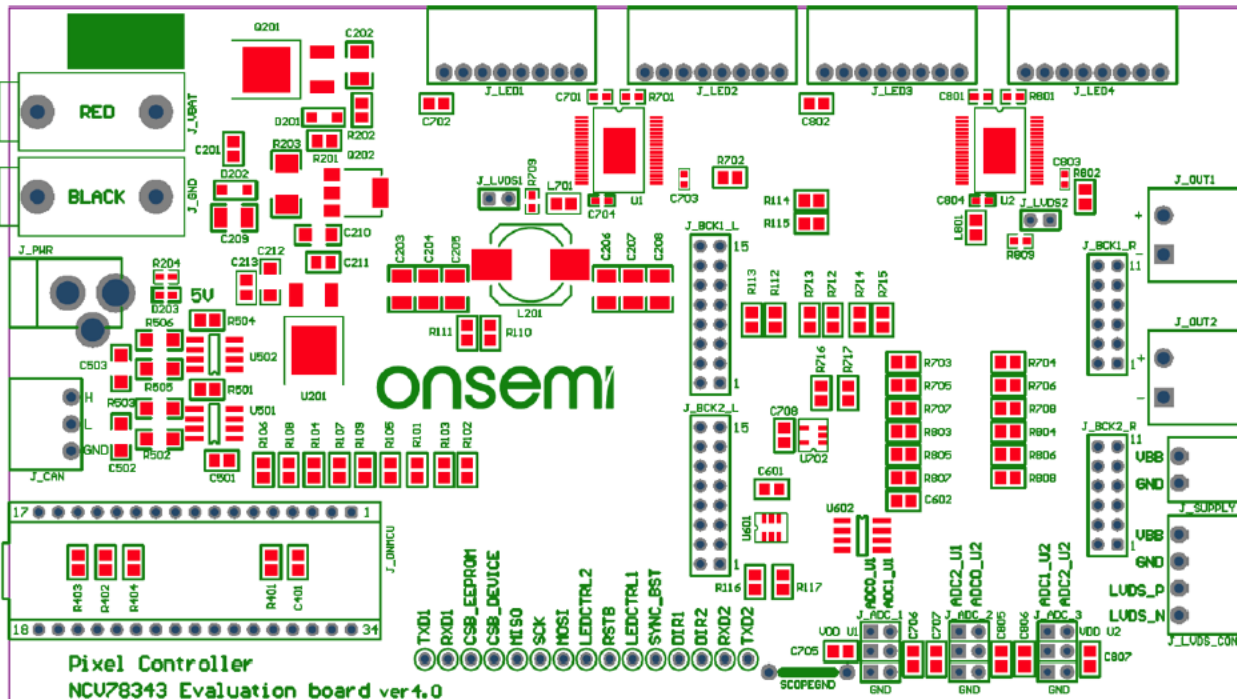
NCV78343R1GEVB Evaluation Board Assembly Drawing
